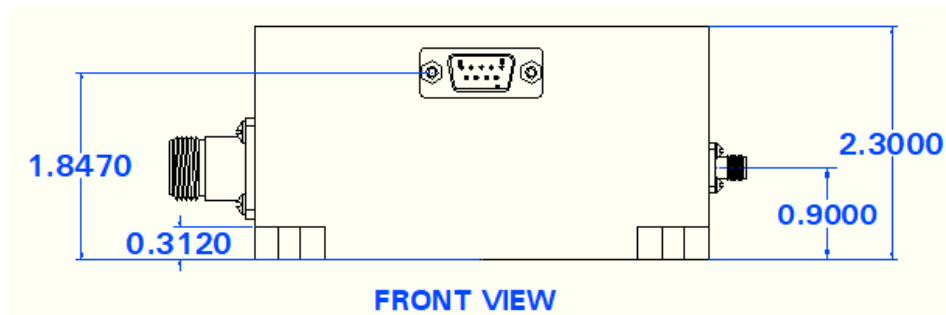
500-1000 MHz 1500W CW PIN T/R Switch mechanical dimension, front view.
